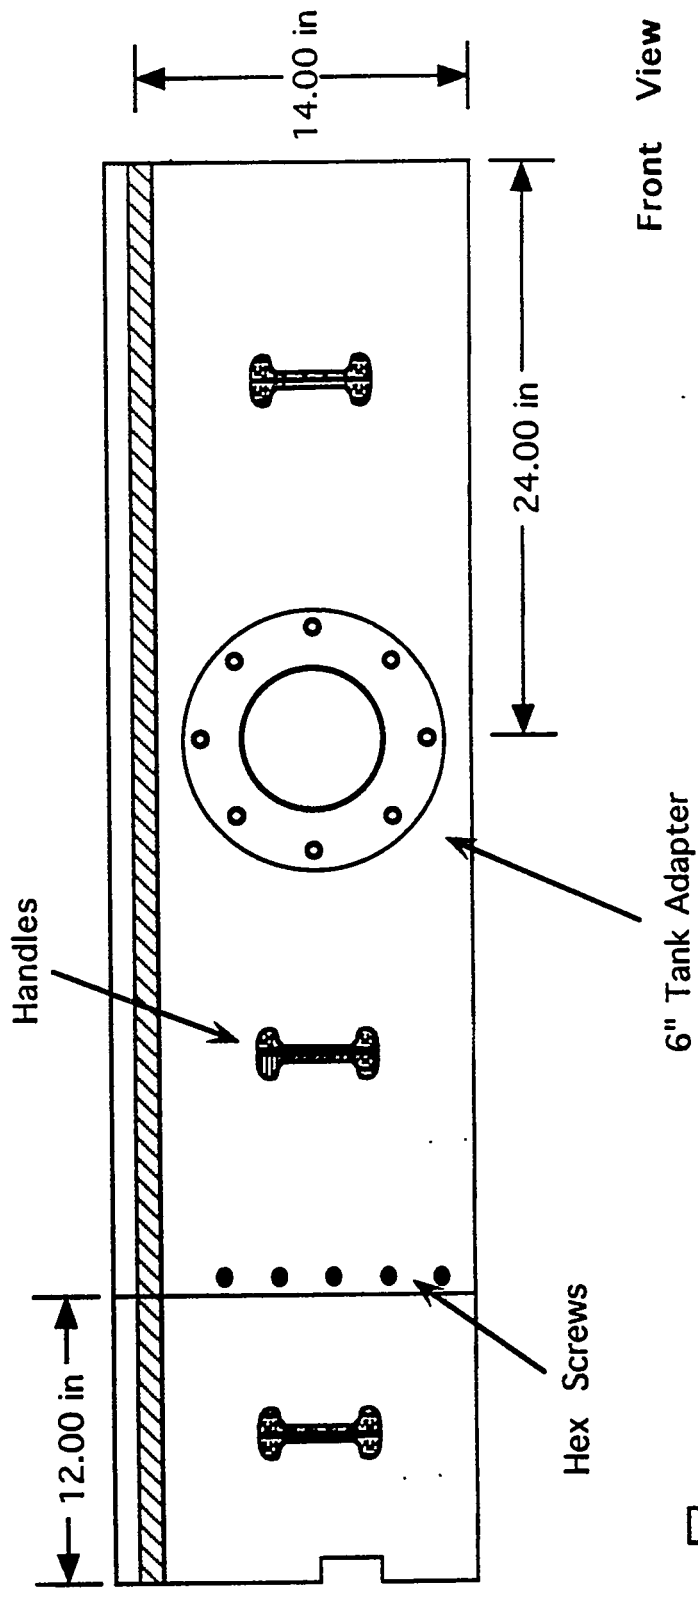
Alpha Box Showing Stainless Steel Frame Assembly
